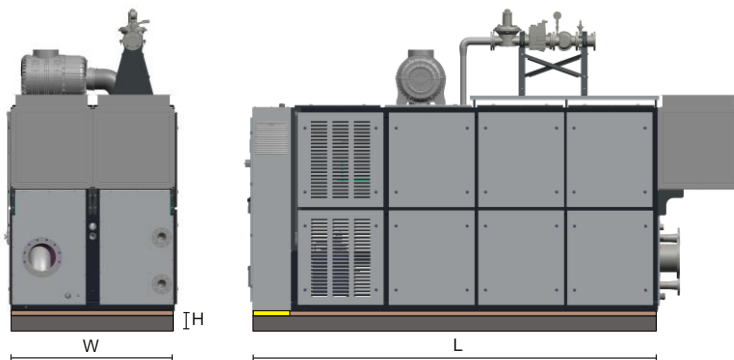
Sample installation designs – depiction without fittings and safety equipment (dimensions in mm)
